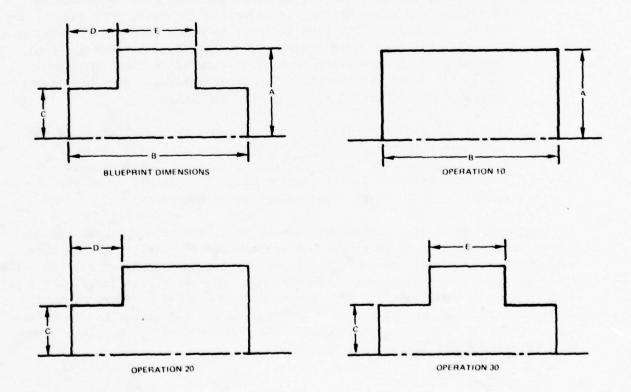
MACHINING TO BLUEPRINT DIMENSIONS
